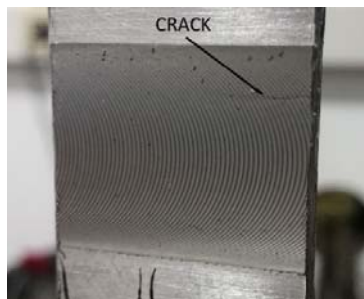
Fatigue crack in a FSWeld-bonded joint
